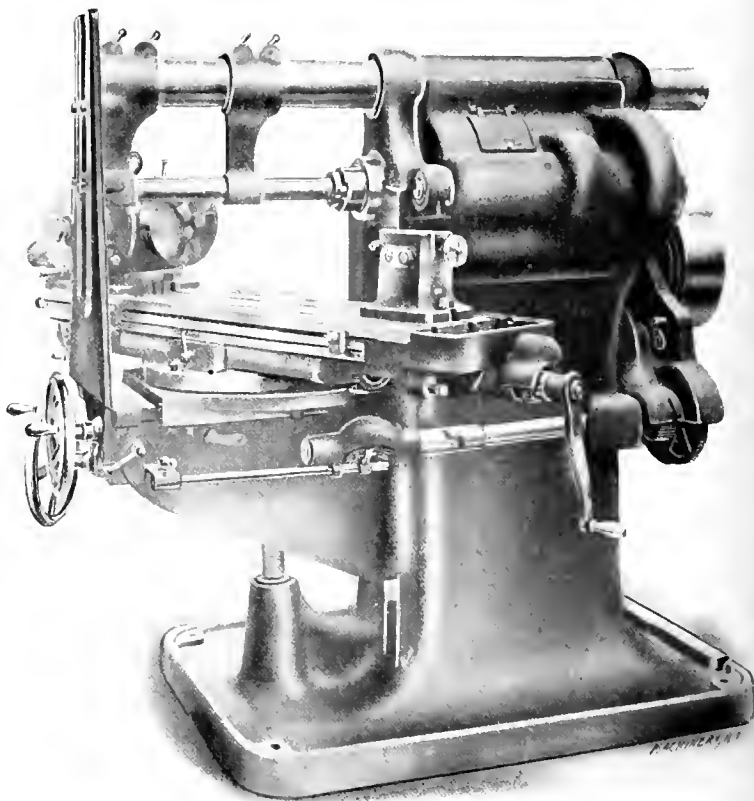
View of Universal Milling Machine showing General Arrangement of Feed Mechanism
